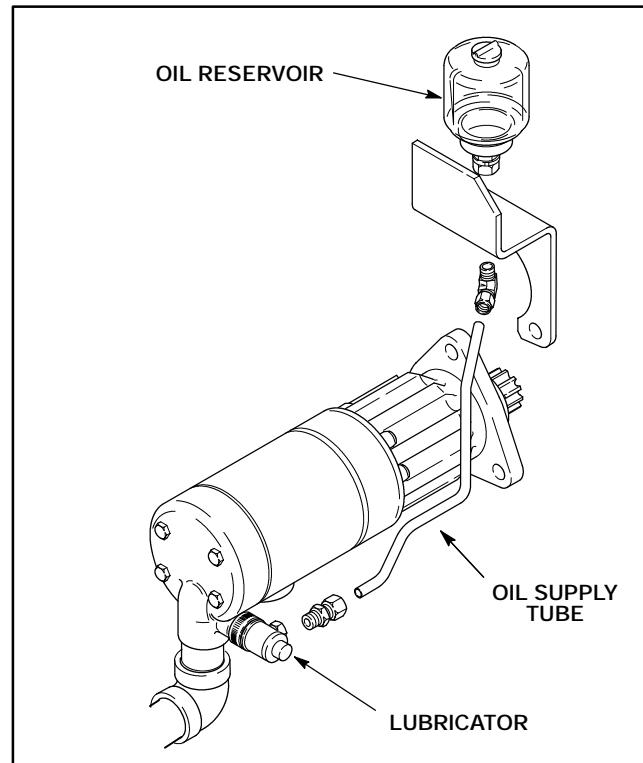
Air/Gas Starter Lubricator Oil Supply
